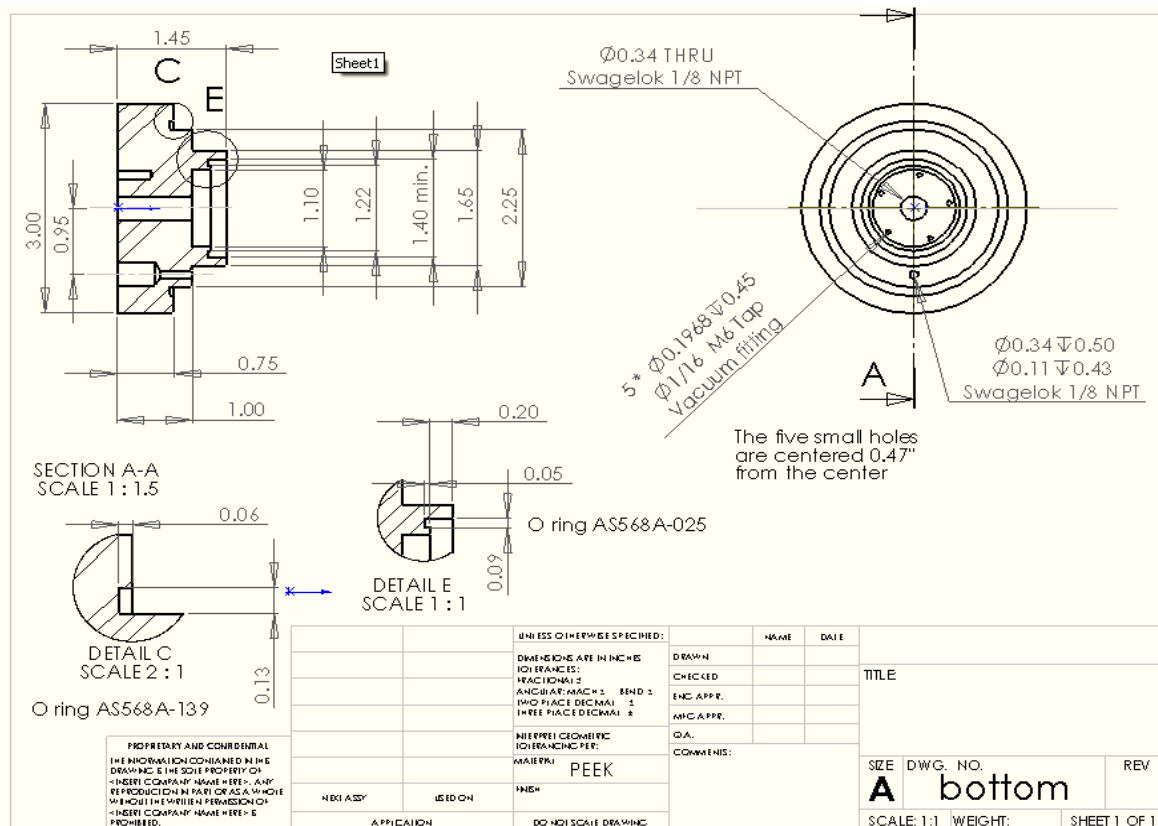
C: Bottom piece with five small ports, extracted vapor port and a port for the excess vapor.
